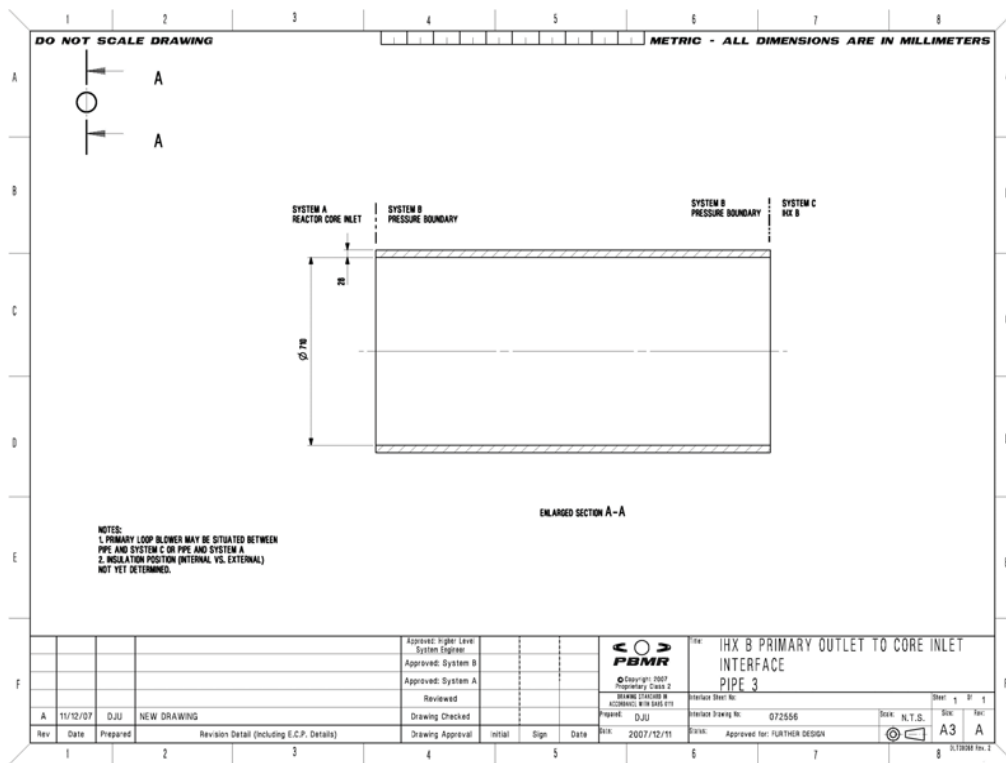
IHX/Piping Interface Drawing Pipe 3
